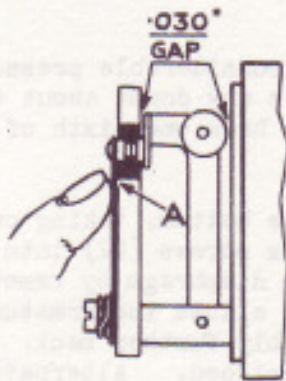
SHOWING THE SPRING BLADE (2) BEING PRESSED IN AGAINST THE LEDGE AT "A" SO THAT THE OUTER ROCKER CLEARANCE CAN BE MEASURED.
